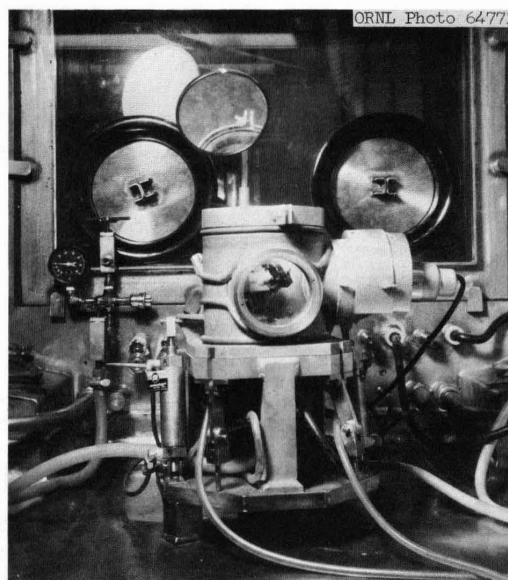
In-cell, inert-atmosphere chamber for gas tungsten-arc welding.
